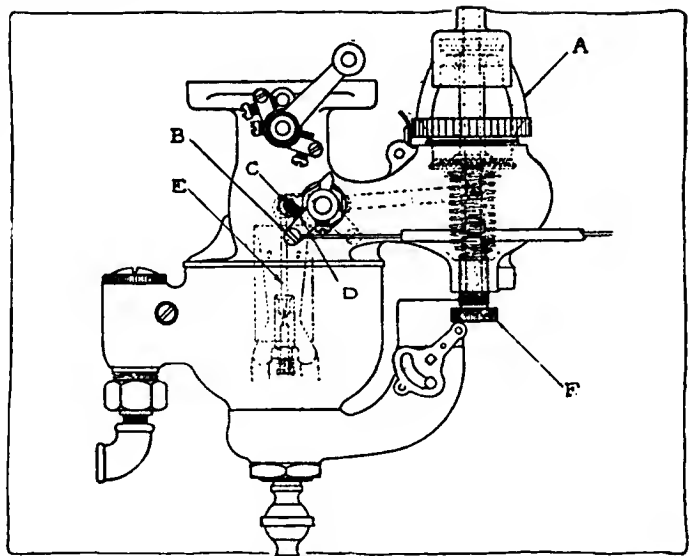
Adjustment diagram of Schebler carburetor used on 1916 Studebaker four-cylinder model
